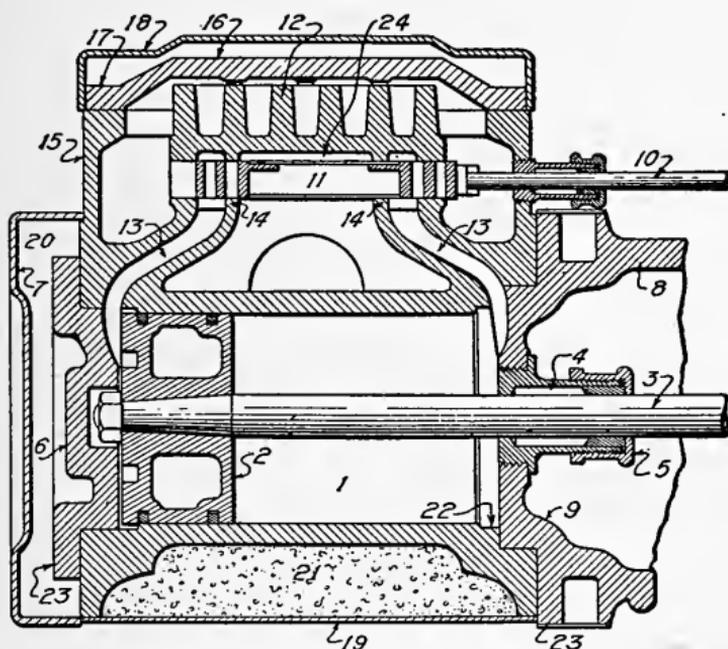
Cylinder and Valve Mechanism Shown in Section
